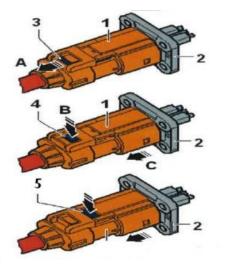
Locking connectors: Pull out lock 3 in direction A, Push mechanism 4 in direction B and pull off connector 1 until it is against the second lock, Push mechanism 5 in direction D and the connector can now be removed completely
